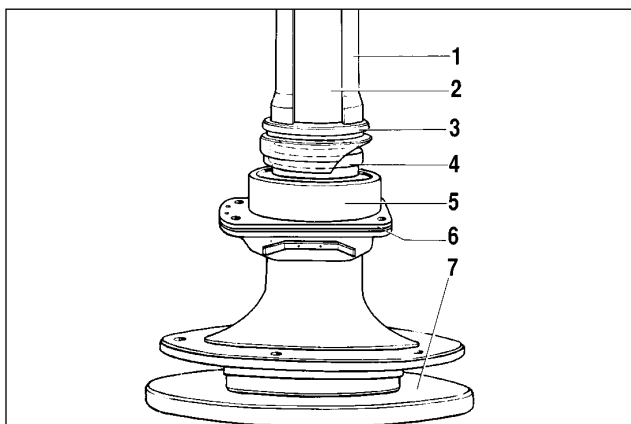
Press-fitting the axle shaft bearing stop ring:
